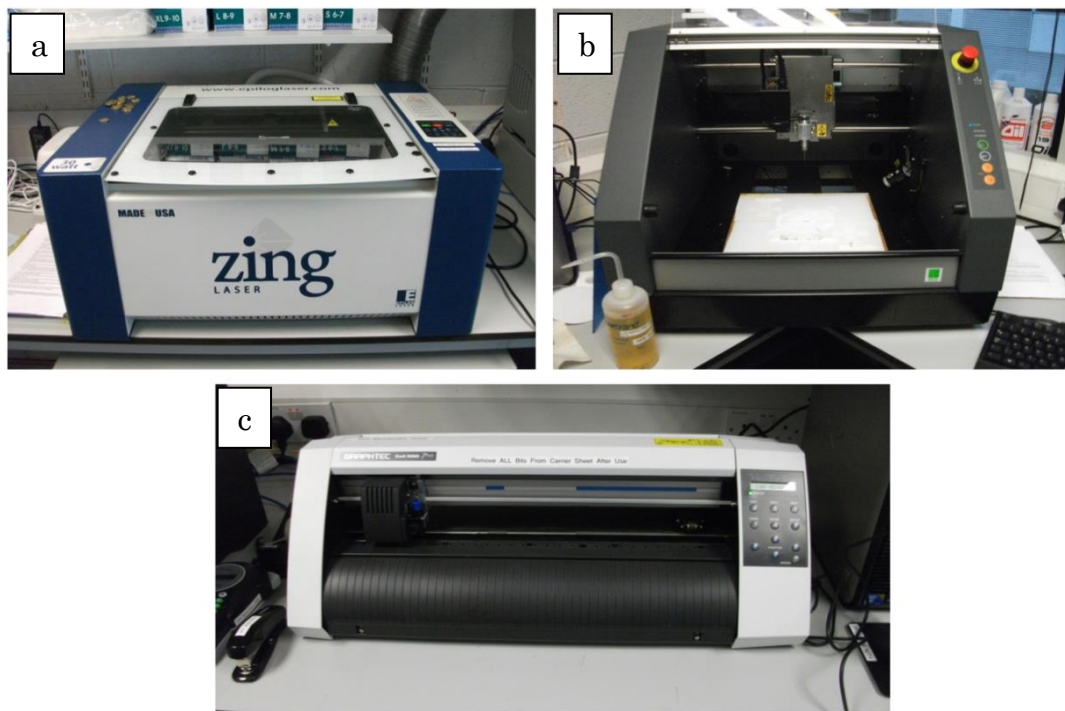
Equipment used for microfluidic disc fabrication. a) Laser cutter used to cut polymer layers of the disc. b) CNC milling machine used for precision cutting of polymer layers. c) Knife cutter used for cutting the PSA layers of the disc.
